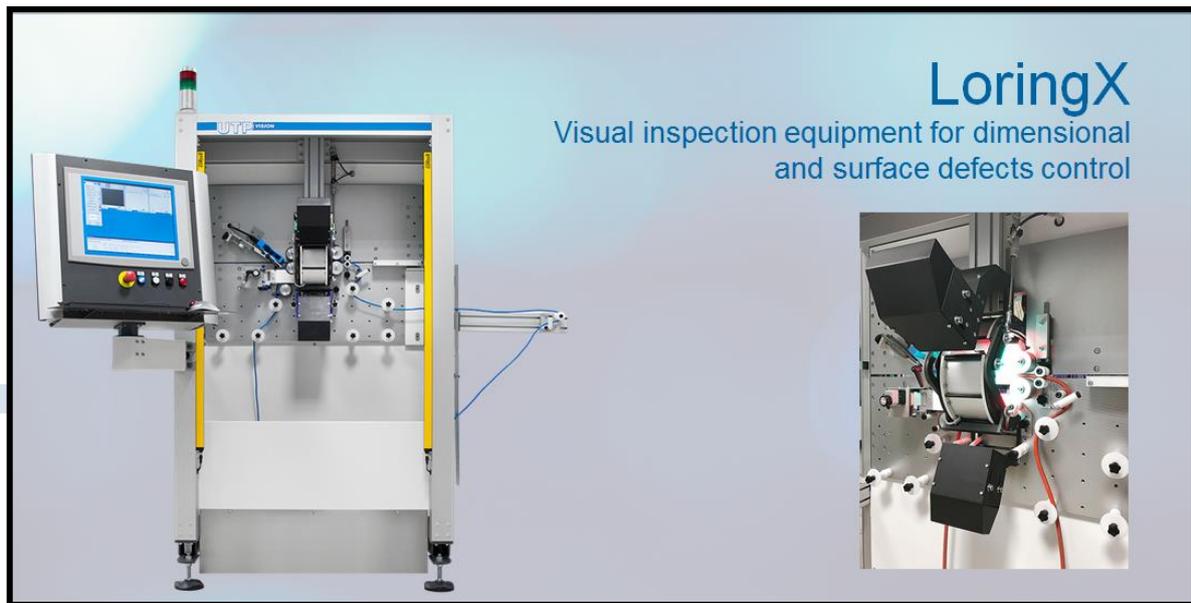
State of the art of visual and dimensional inspection of large diameter O-rings [3]
